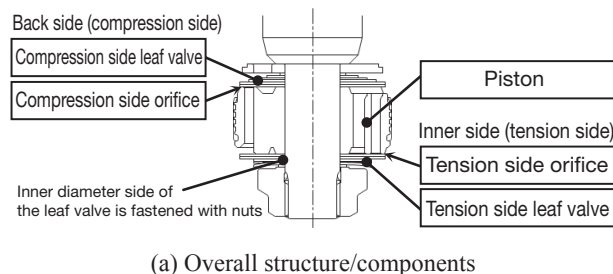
Inner seat surface form within the piston of the newly developed valve
